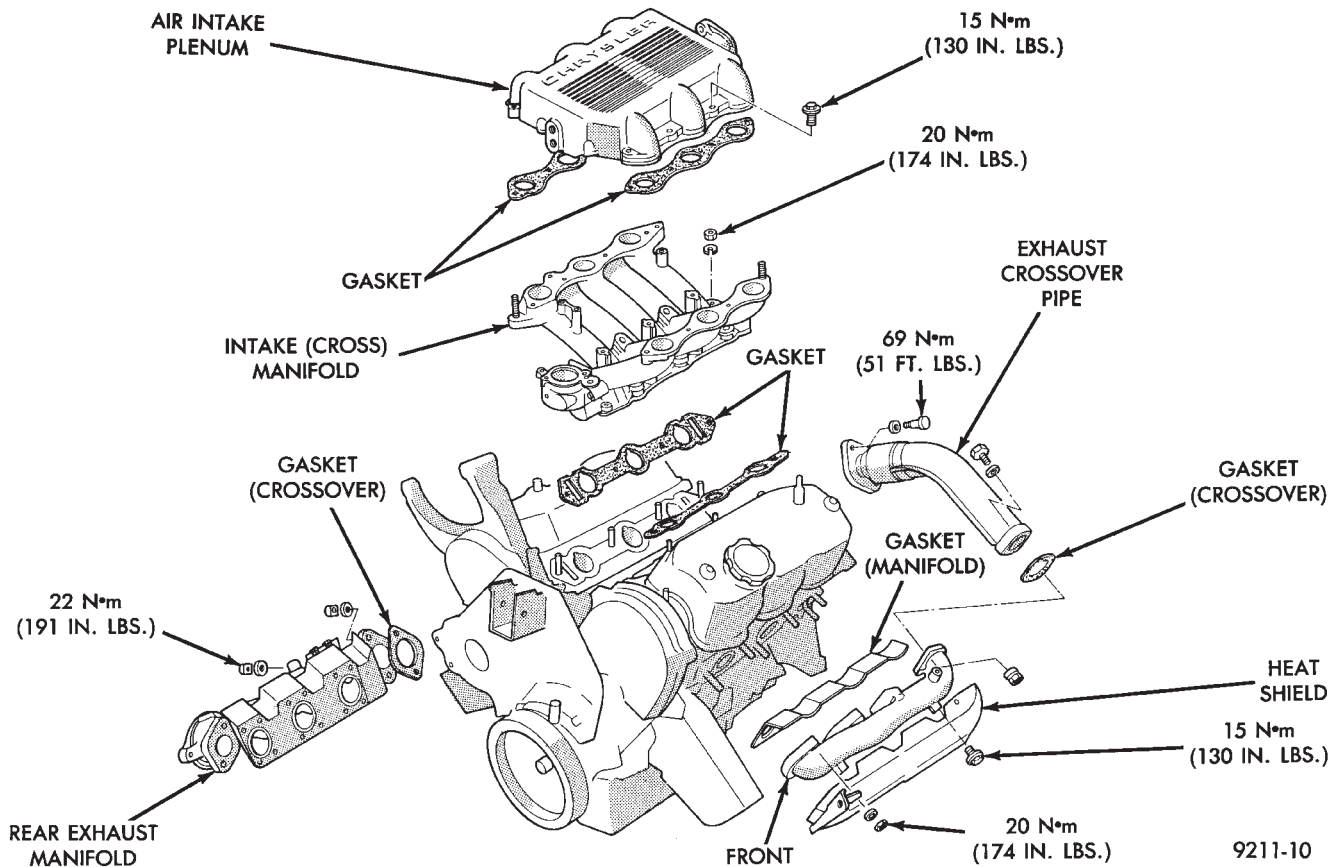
Intake and Exhaust Manifolds— 3.0L Engine
